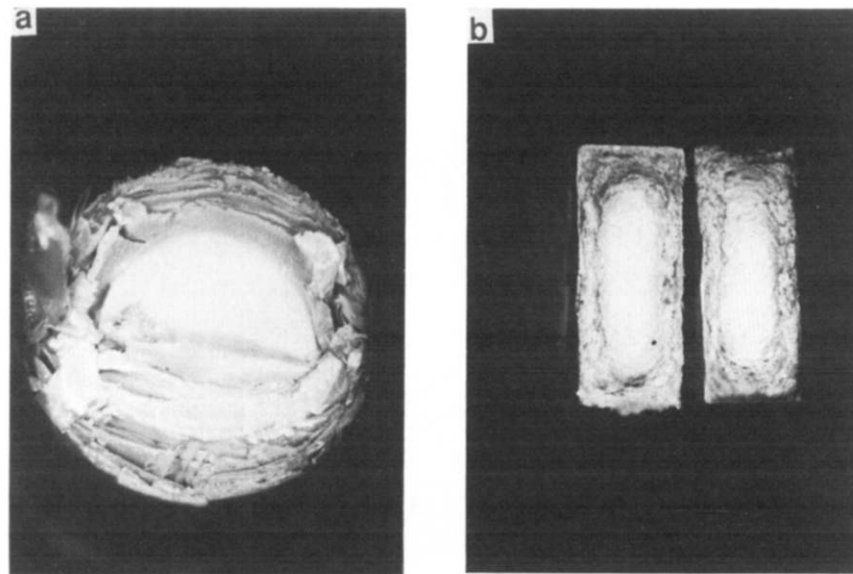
Section of (a) the sprue of an unfilled moulding and (b) the tensile fracture surface of a 40 wt% mineral filled moulding
